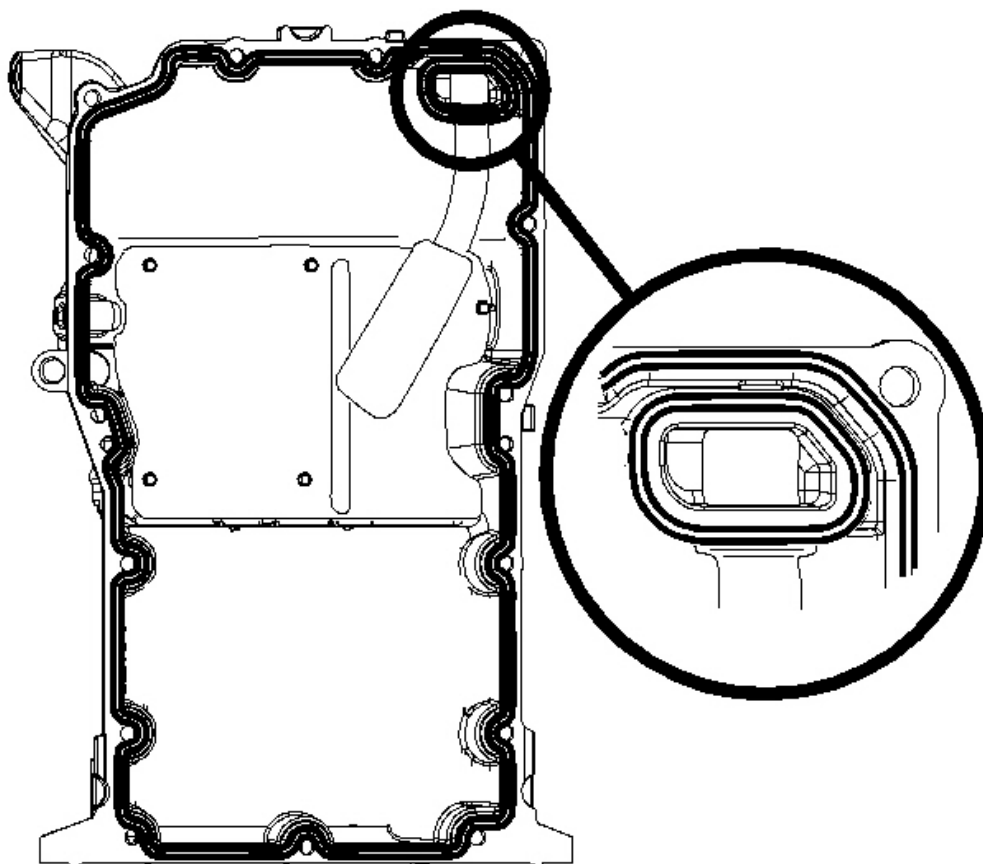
Applying 2 mm bead of Permatex(R) To The Oil Pan
